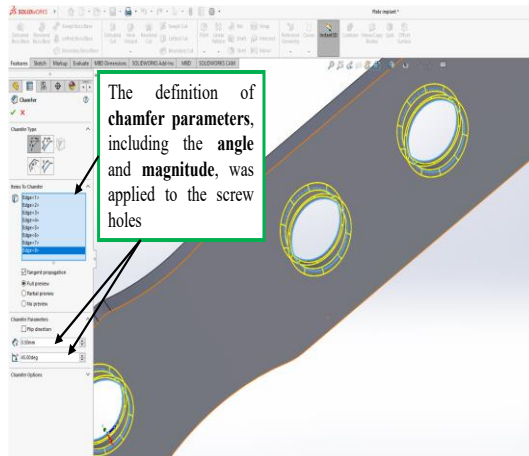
Chamfer operation for large-sized screw holes on the plate implant
